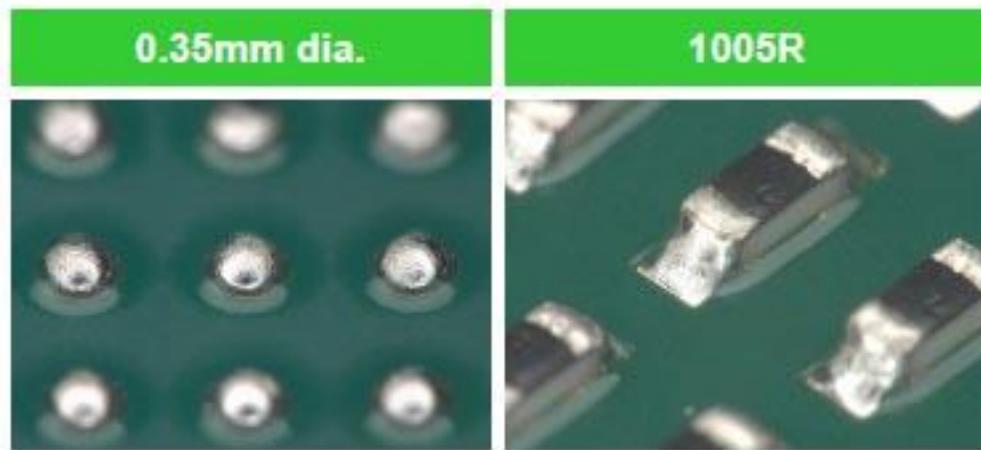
Crack-free Paste A wetting/reflow test data for 0.35mm diameter board pads and soldered 1005R soldered chip components.
